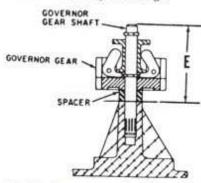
Governor gear and shaft installation on Models VH70, VM70, VM80 and VM100. Dimension (E) is 1-1932 inches (40.5 mm).
